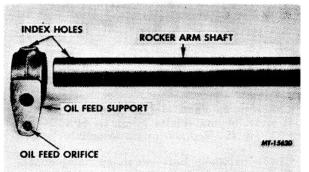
Aligning Holes in Rocker Arm Shaft and Support
